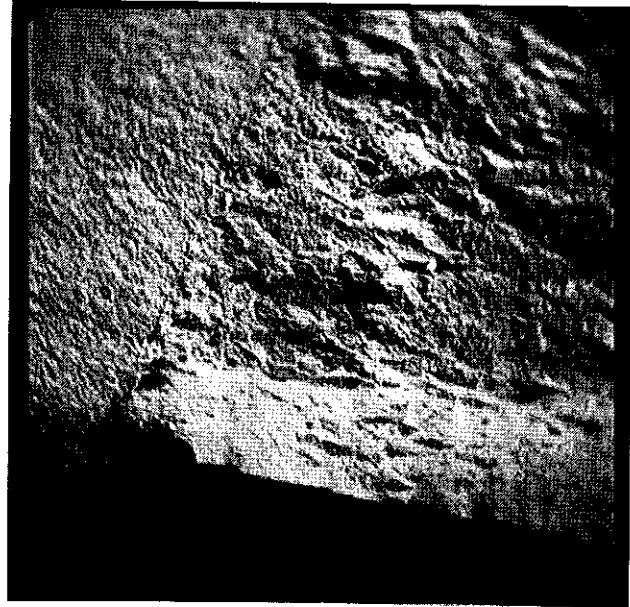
SEM FRACTOGRAPH SHOWING SHEAR LIP AT BOTTOM AND FATIGUE CRACK ON LEFT OF 5 mm THICK SPECIMEN. MAGNIFICATION X 60
